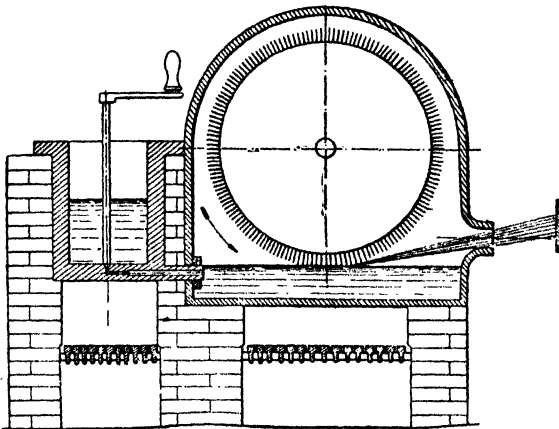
Improved Device for Mechanically Spraying Molten Metal.
